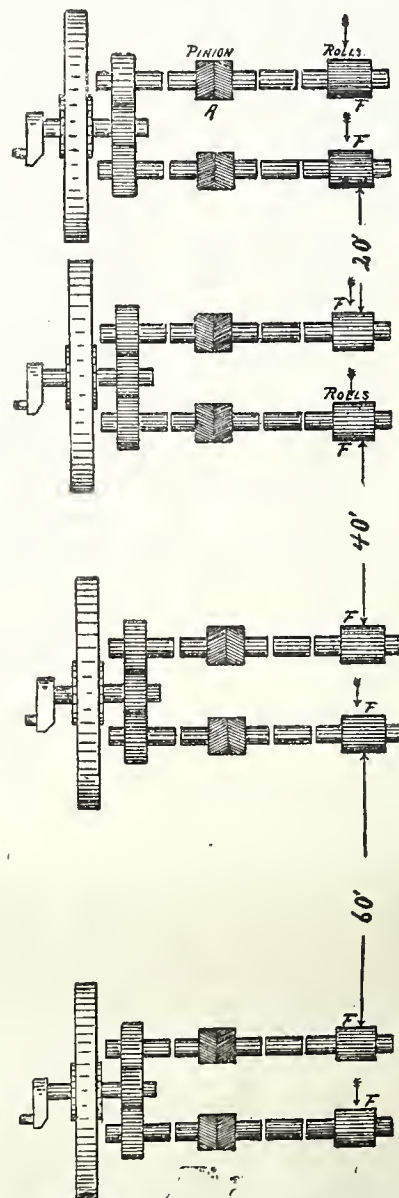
The Howell Continuous Sheet Rolling Mill.
